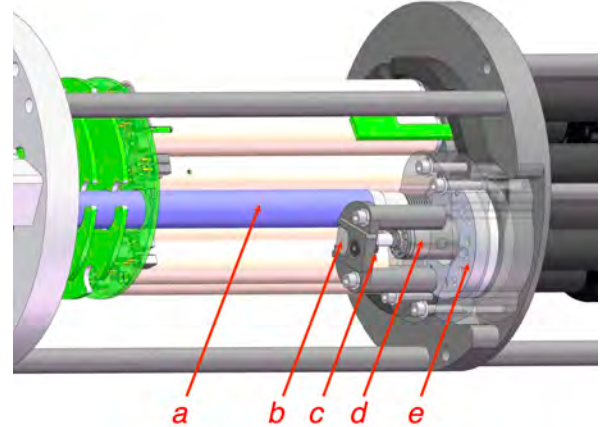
A drawing of the BioWheel components installed in the C-OSPREy radiance radiometer, as follows: a) CGS fiber tube, b) encoder, c) encoder magnet, d) stepper motor, and e) filter wheel.
